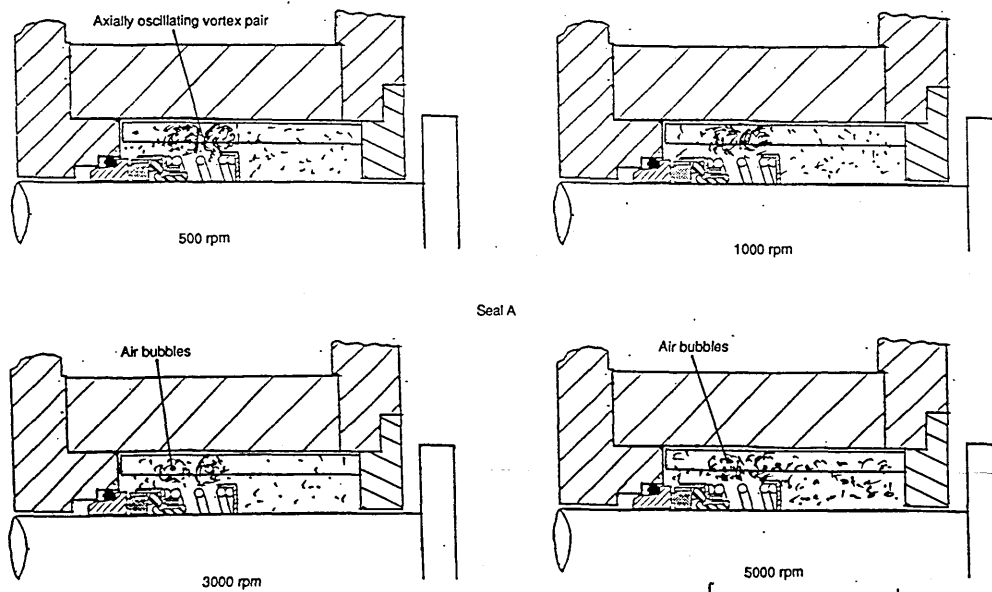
Wide radial clearance housing - Plan A/Helical strakes
